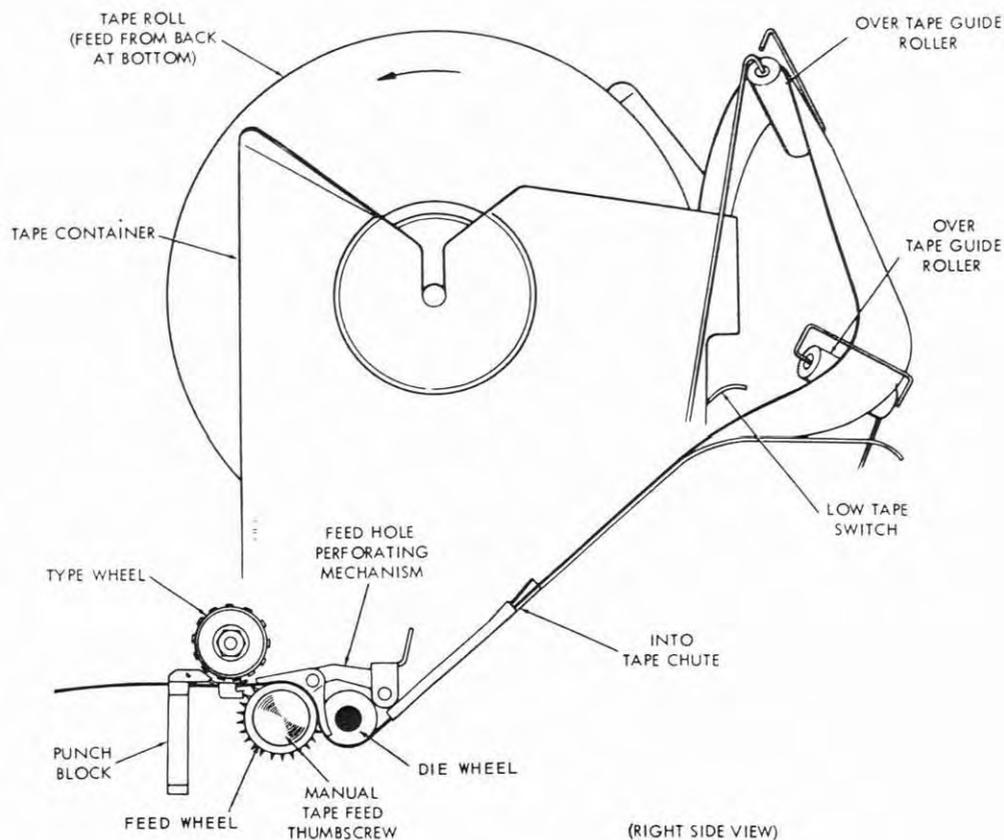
Path of tape in auxiliary typing reperforator.
